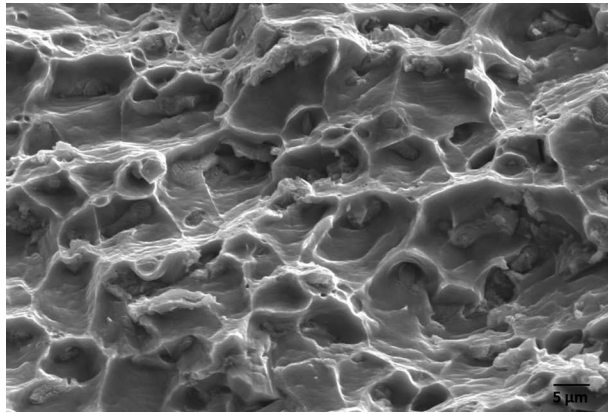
Higher magnified image of the fracture surface shown in Fig. 126 indicating dimple feature indicating ductile fracture
